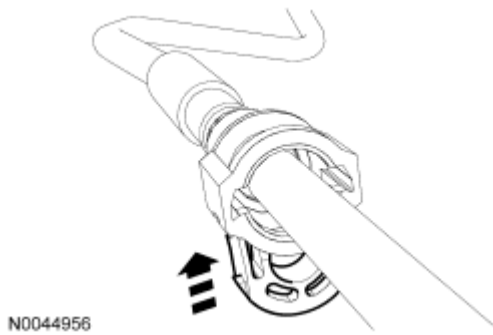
Depressing Quick Connect Coupling Locking Mechanism Into Locked Position
